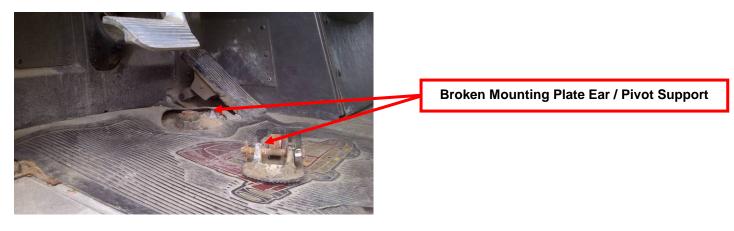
A detached brake treadle illustrates a potential result of excessive corrosion damage.
